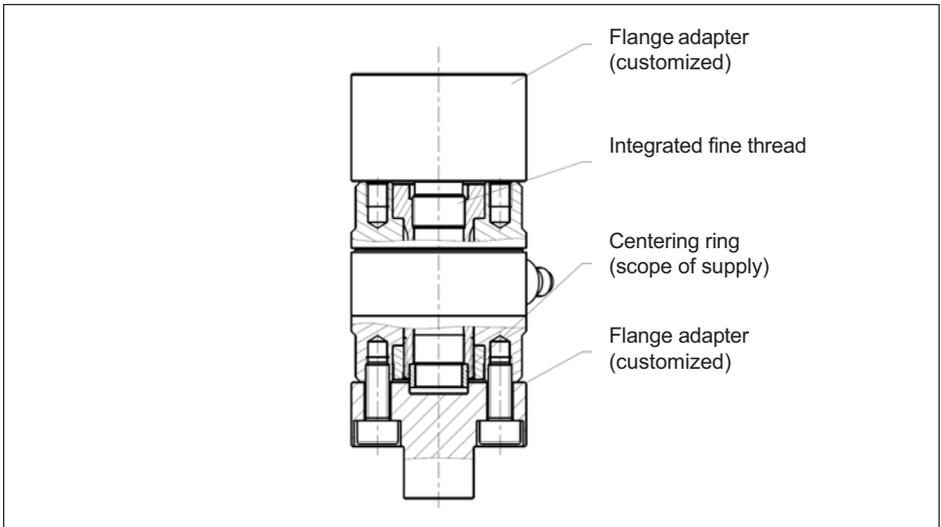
Centering aids on the upper and lower mounting surfaces
